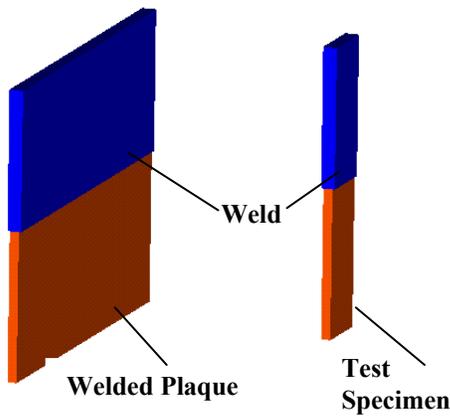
Model of welded straight butt joint (consists from two molded plaques welded together. Thickness of plaques is 6 mm and 4 mm) and machined / cut test specimen (width = 10 mm)
